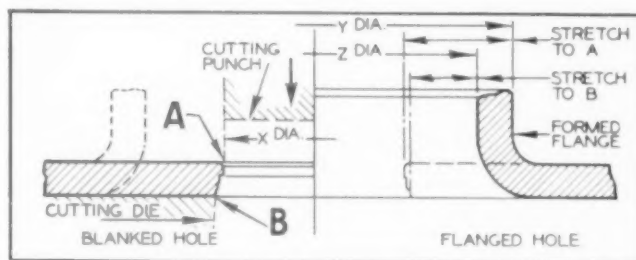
, showing flaring of edge of an opening. Because the bottom edge is more likely to split than the top edge when being stretched, the cutting of the hole should be done from that side of the metal on which the flange will later be formed. Corner A is smoother than corner B because the cutting punch entered the metal from the top face. In flanging, corner A is stretched to diameters x to y. Corner B is stretched a lesser amount, or from diameter x to z; thus, the smooth edge—being at the point of greatest stretch—minimizes the danger of splitting.
